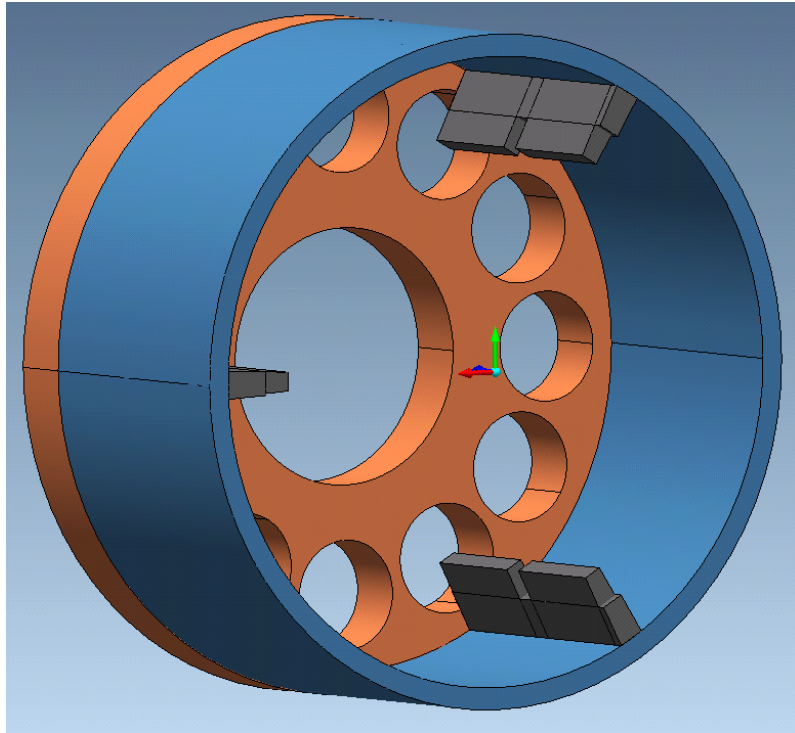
The assembled motor housing of three different components: housing main body, housing back cap & housing teeth
